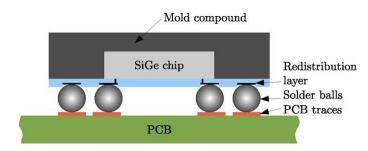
Cross-section drawing of an eWLB package for radar chips [51]
